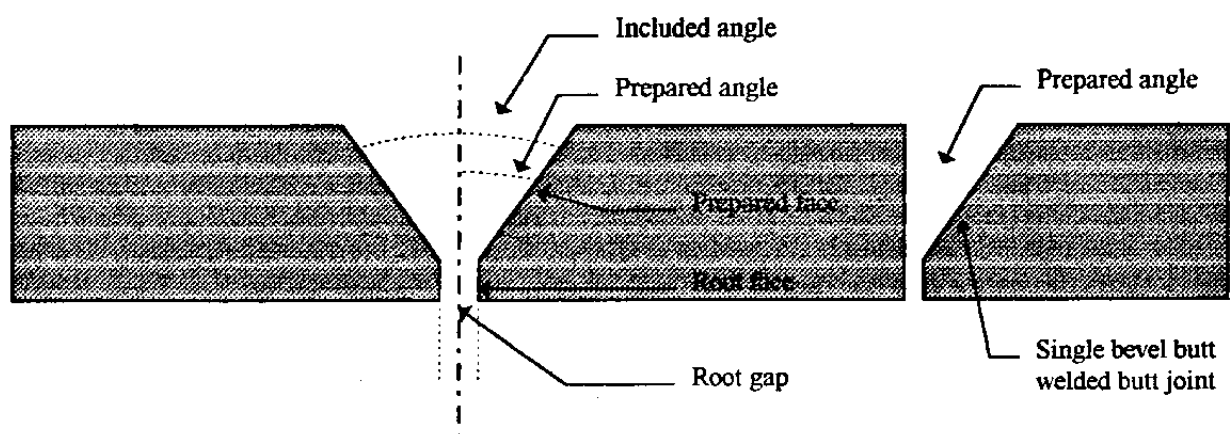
Plate Edge Preparation (Single "V" & Single bevel welded from one side only)
